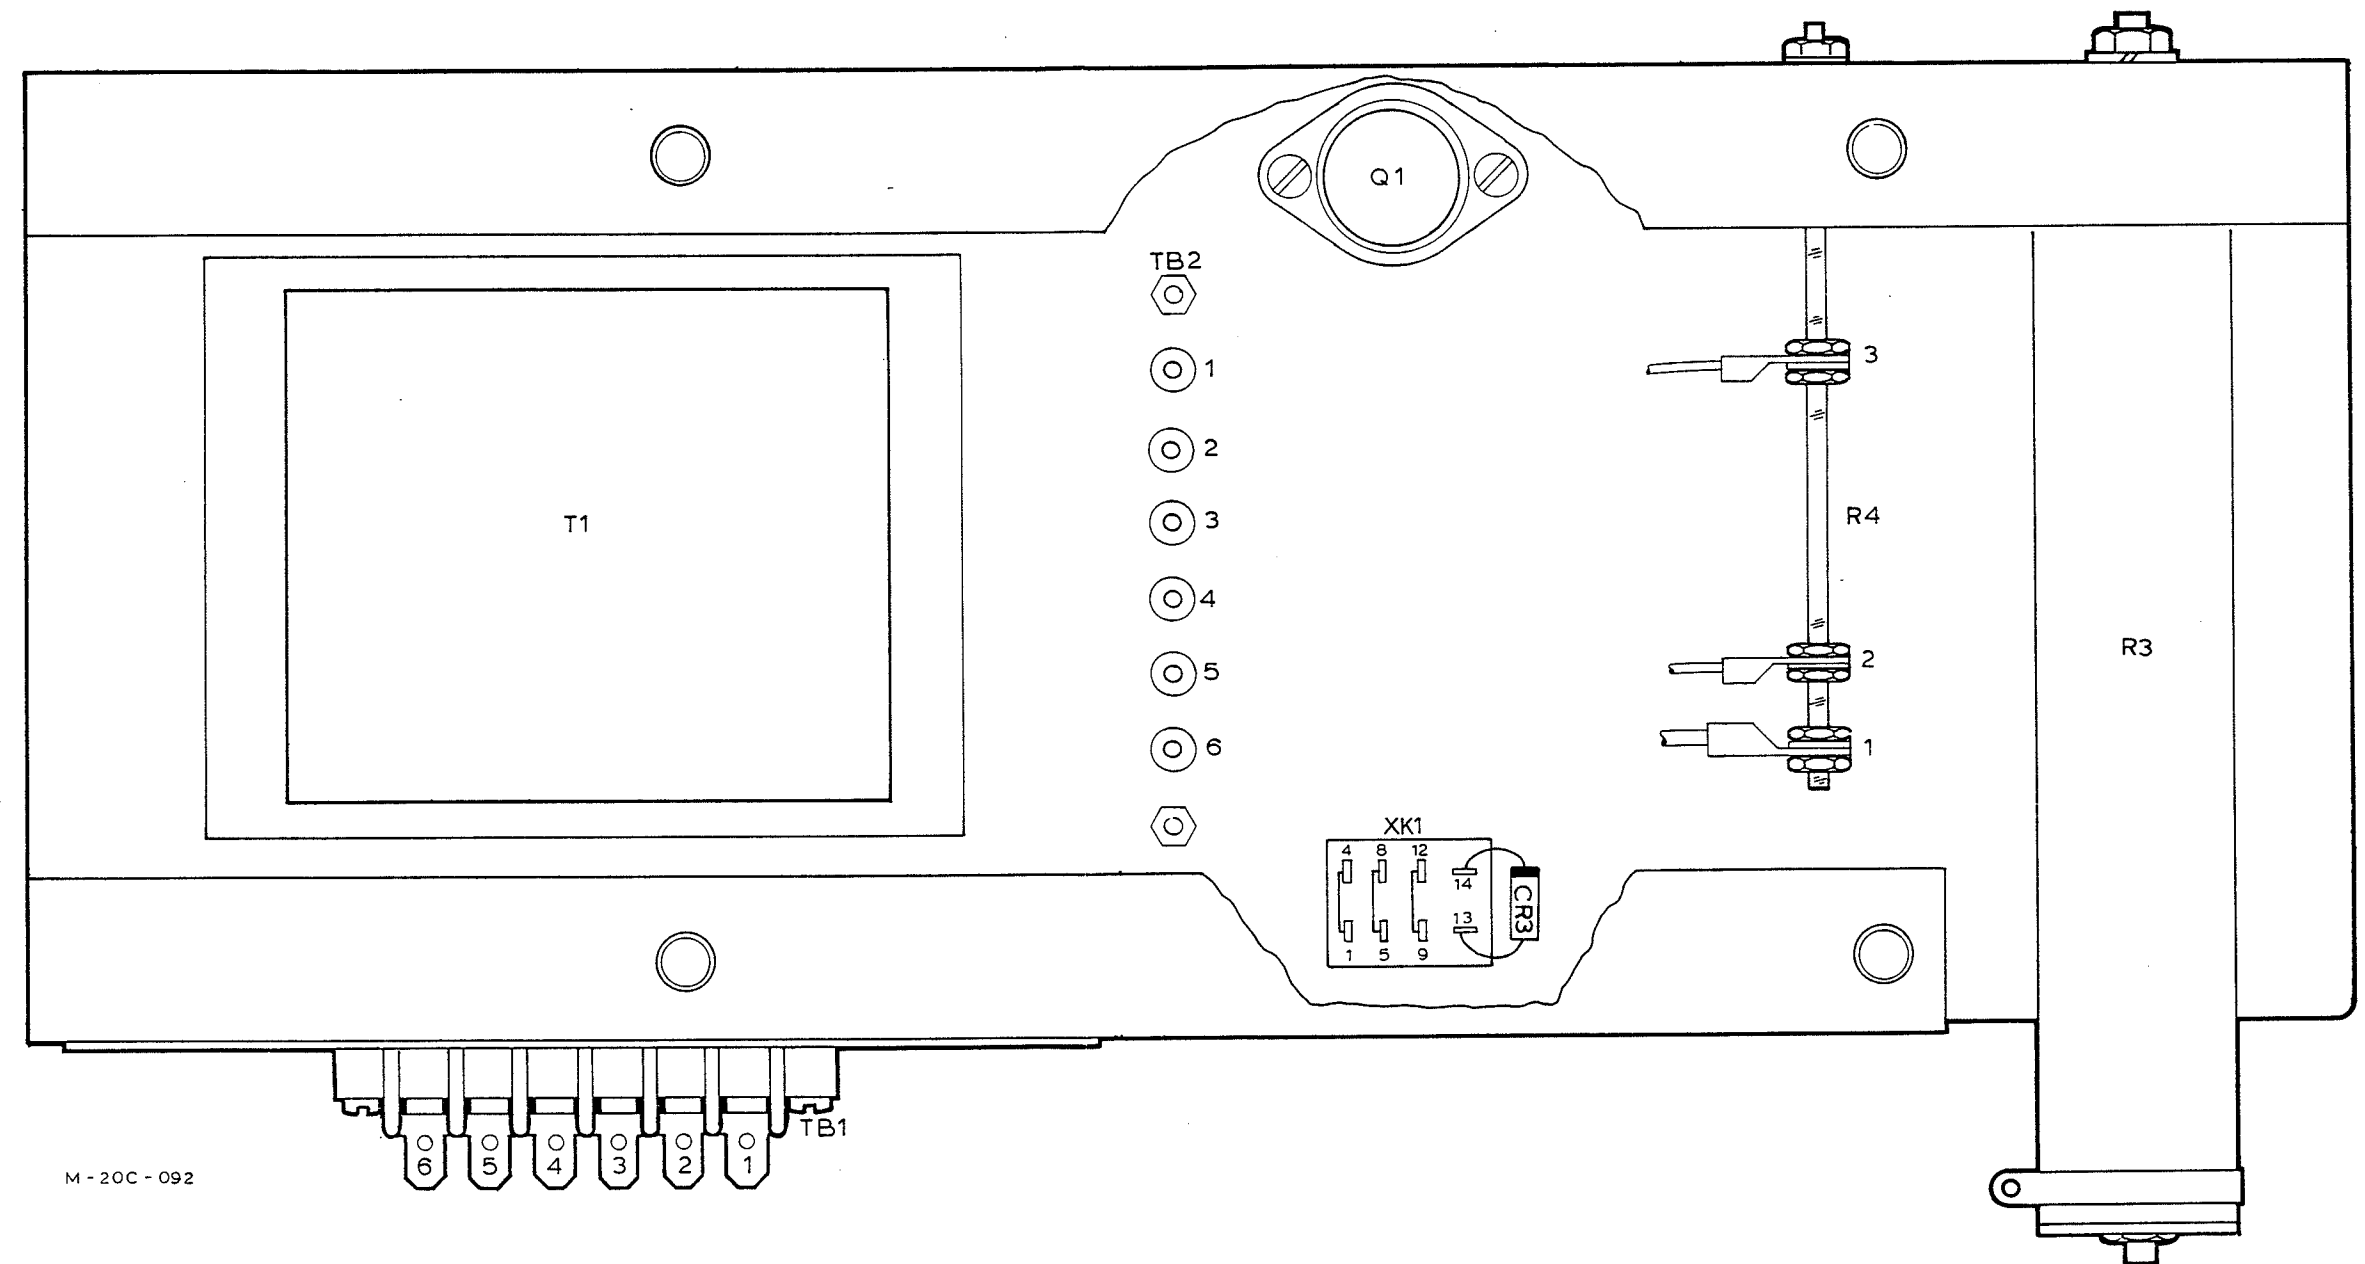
Assembly Detail - NAS17 PA Power Supply Assembly (Side 2)
